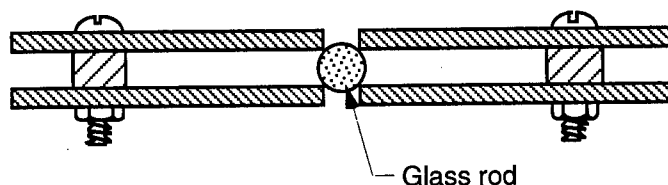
Mask for vacuum depositing metal strips on core glass rod.
